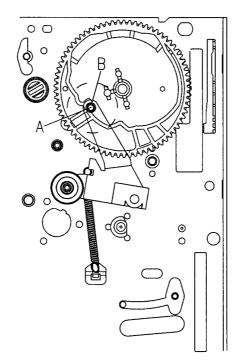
DATUM POSITION OF PINCH LEVER TOTAL ASS'Y & CAM GEAR
